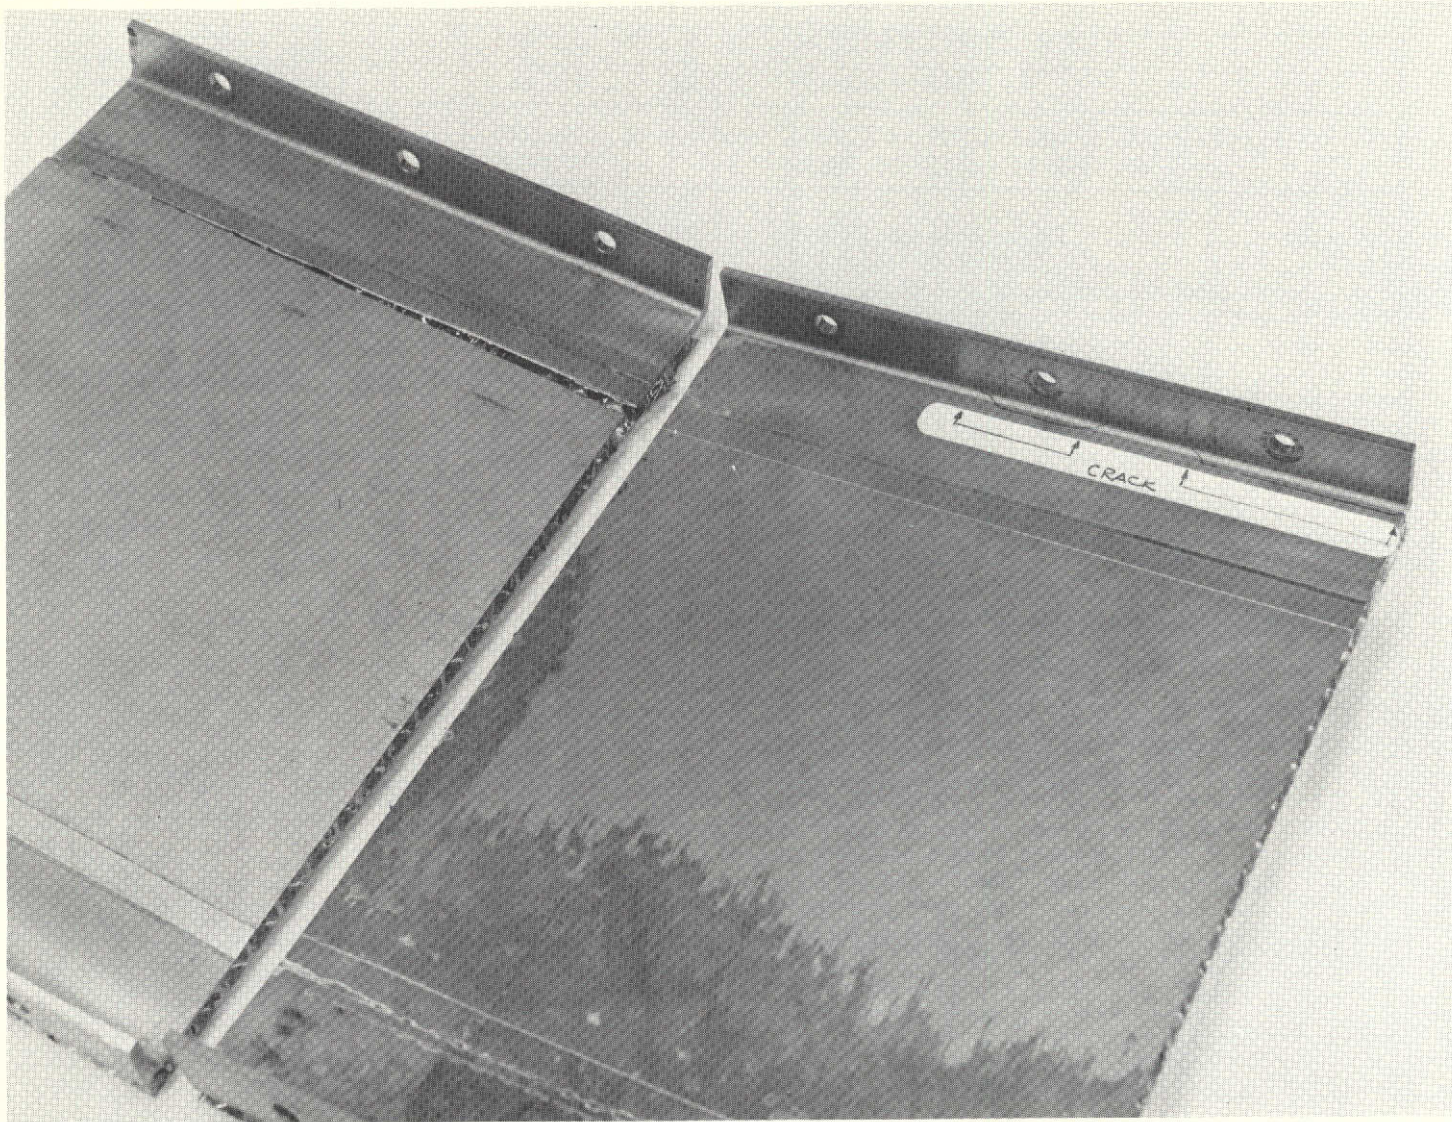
TYPICAL STATIC AND FATIGUE TEST FLANGE PANEL FAILURES
